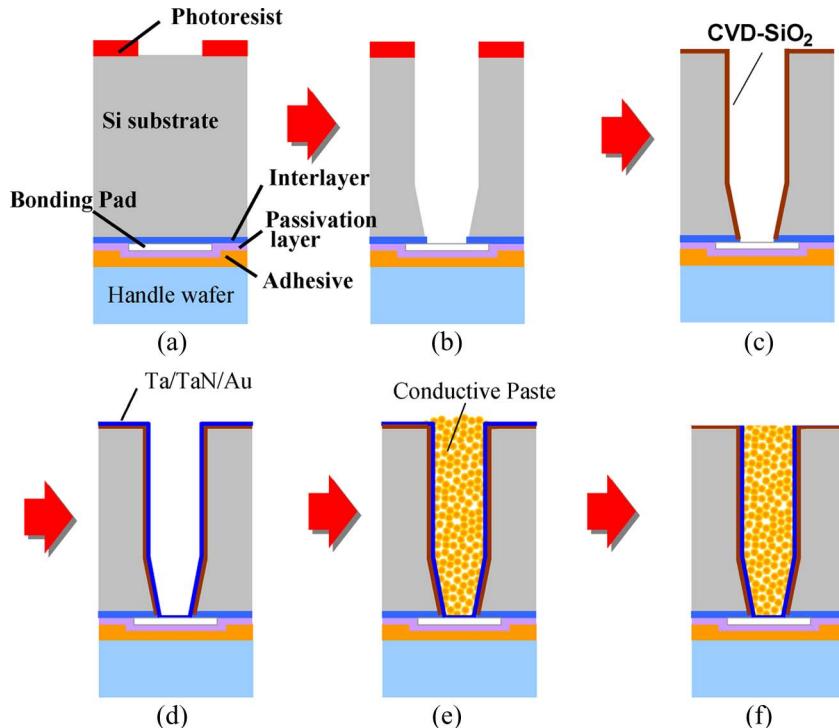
Process flow for TSV filling with conductive paste. (a) Back side lithography; (b) deep Si etch and SiO_2 RIE (1); (c) SiO_2 deposition and RIE (2); (d) contact metal/barrier metal deposition; (e) paste printing; and (f) contact and barrier metal removal.
